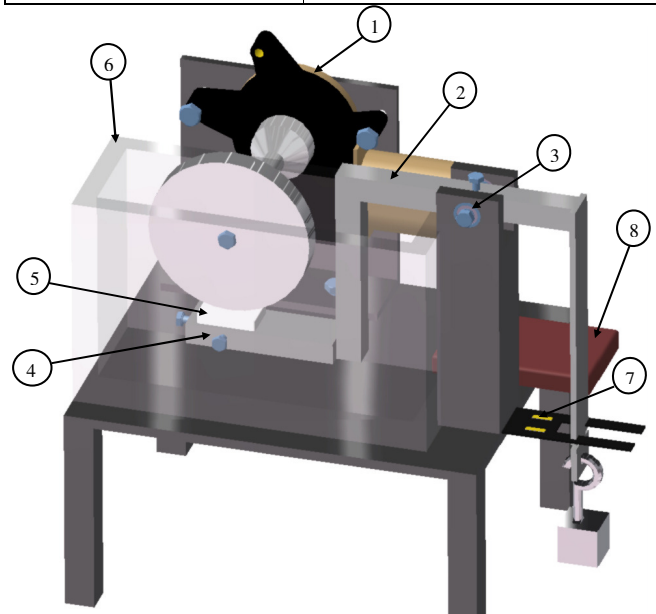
Three dimensional view of the new machine designed using CATIA software. 1 -Motor, 2- Arm, 3- Pivot, 4- Specimen holder, 5- Specimen, 6- Lubricant container, 7- Strain gauge, 8- Strain gauge sensor circuit
